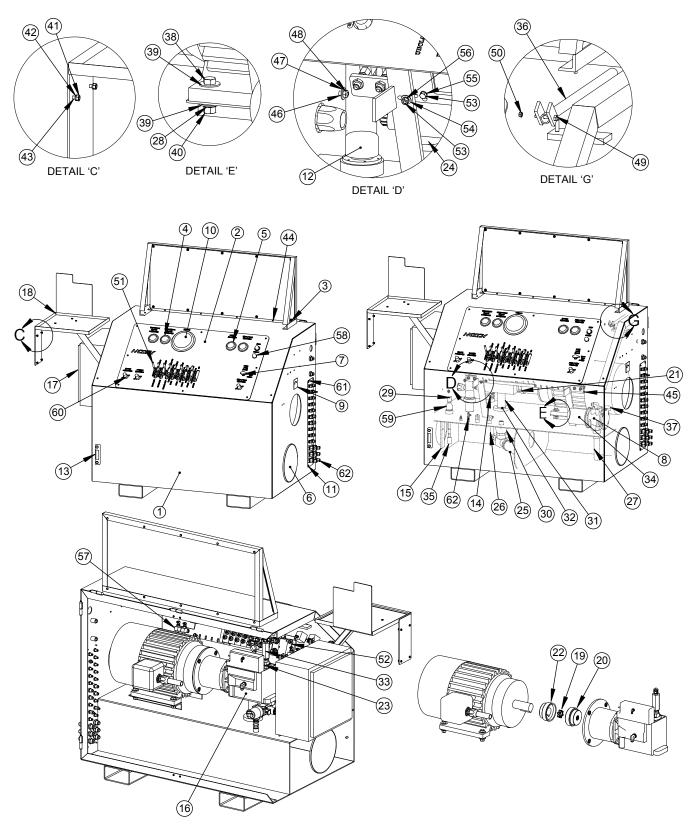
RP5047-6000 Control Console Power Unit Assembly
